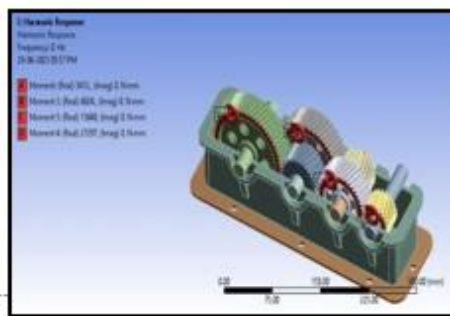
Driveshaft loading conditions applied to capture rotational effects in existing and modified gearboxes.
